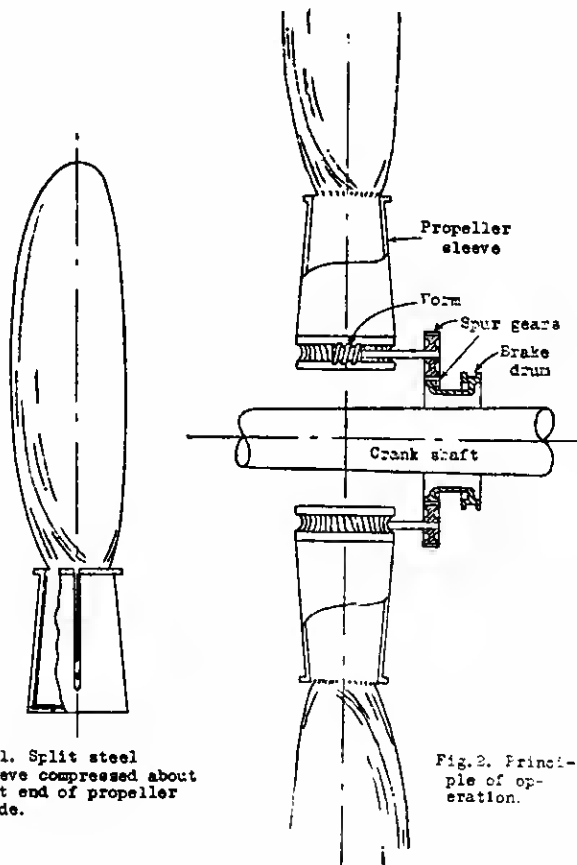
Split steel sleeve compressed about butt end of propeller blade.
